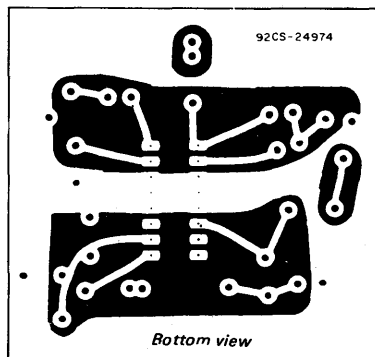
Printed-circuit board (actual size) containing the test circuit, shown in Fig. 3, for the CA3131EM.
